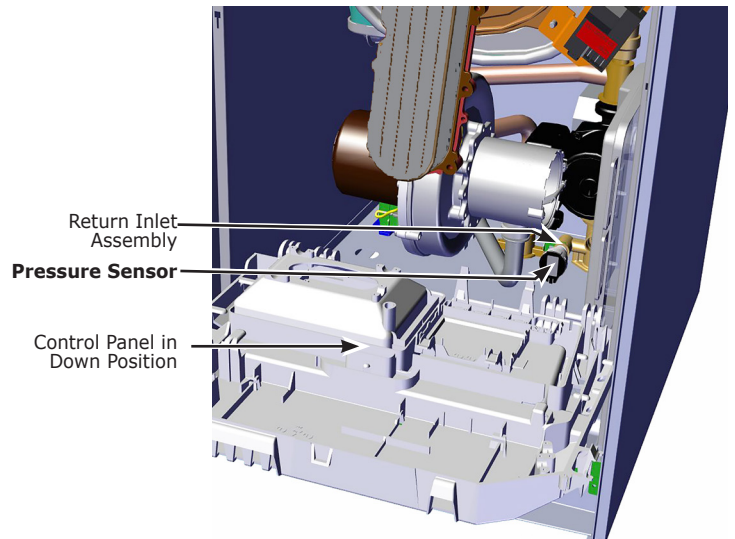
380 Heat Exchanger - Front of Boiler
